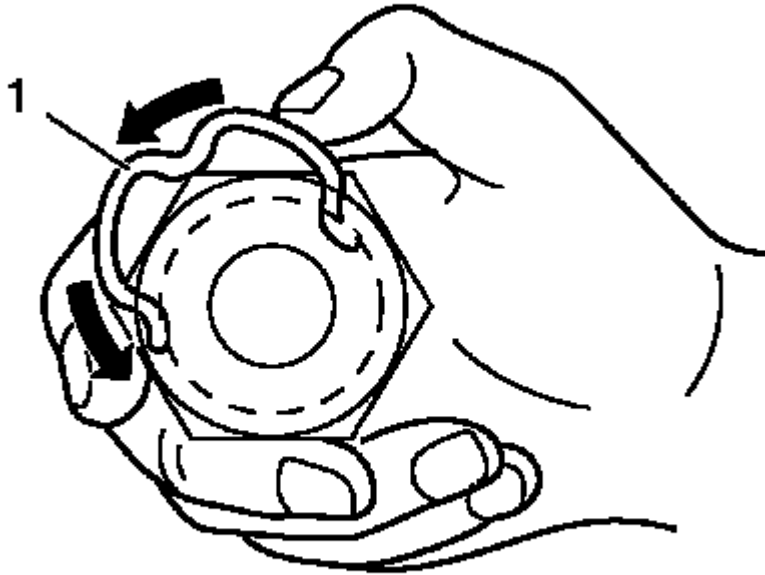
Rotating Automatic Transmission Oil Cooler Fitting Retaining Ring
